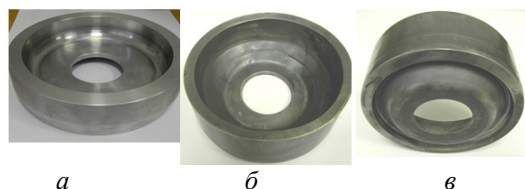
The initial workpiece and the product: a – initial workpiece, b – view of product from the hollow, c – view of the product from the bottom part
